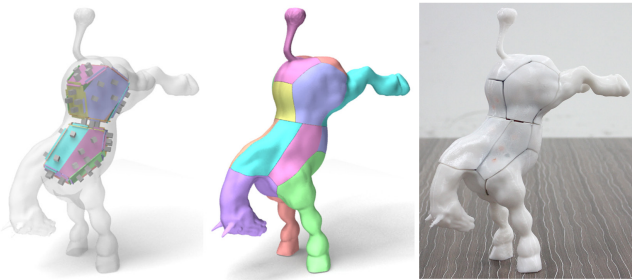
An assembled HORSE model (30cm tall; 18 laser-cut and 16 3D-printed parts) that can balance and stand on two legs.
